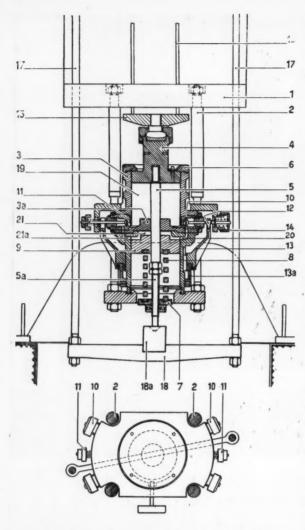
Cross Section Drawing of German Hydraulic Drawing Cushion Showing Details. (1) Press Platen. (2) Holding Rods. (3) Cylinder. (4) Top Piston. (5) Piston Rod. (5a) Piston Rod End. (6) Cylinder Cover. (7) Spring Cover. (8) Piston Spring. (9) Bottom Piston. (10) Pressure Valve. (11) Suction Valve. (12) Adjusting Cones. (13) Bell-Shaped Holder for the Cones. (13a) Adjusting Cylinder for Holder. (14) Pressure Valve Springs. (15) Plate for Ejector Pins. (16) Ejector Pins. (17) Ejector Rods. (18) Traverse for Ejector Rods. (18a) Pan. (19) Liquid. (20) Pressure Valve Duct. (21) Space above Piston. (21a) Duct for Suction Valves.
